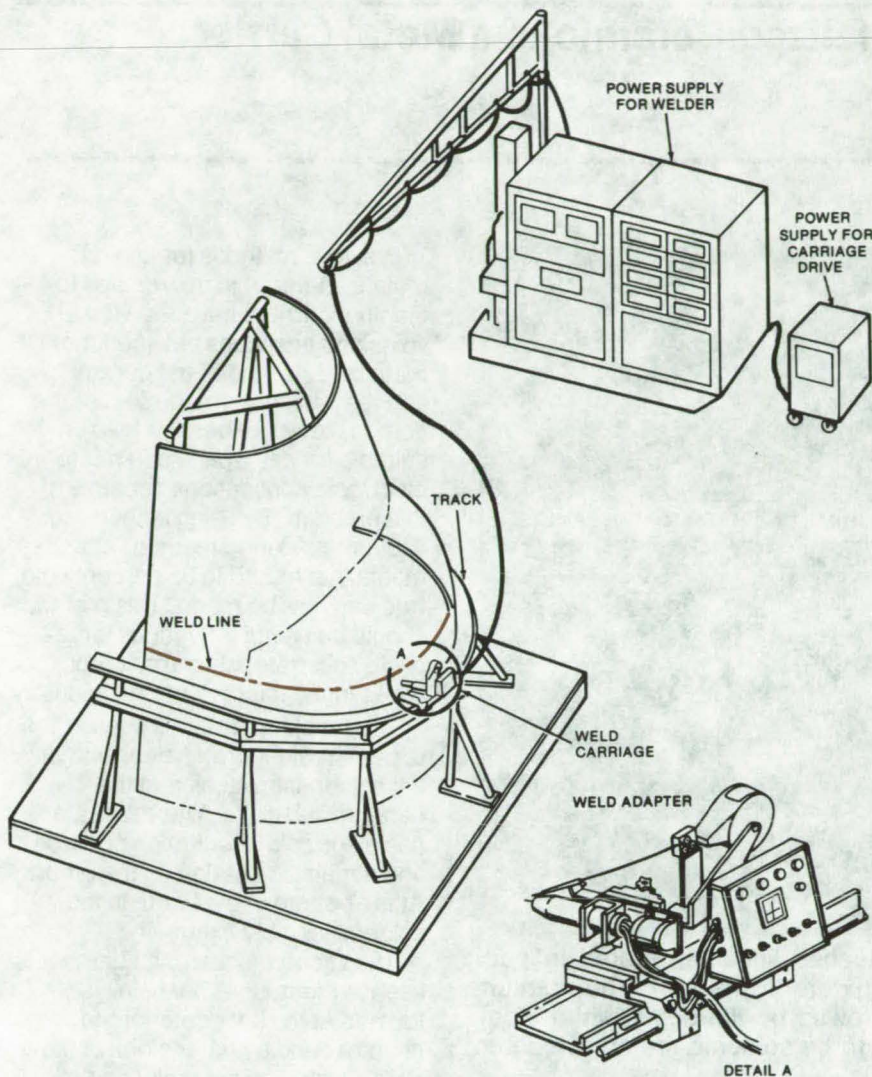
The Universal Skate-Welder carriage can carry a trim tool, a welding torch, or an X-ray head over compound curvatures on any assembly. The three units can be interchanged without need for any adjustment or alinement. The carriage follows a bar on a track, as shown in Figure 2.
